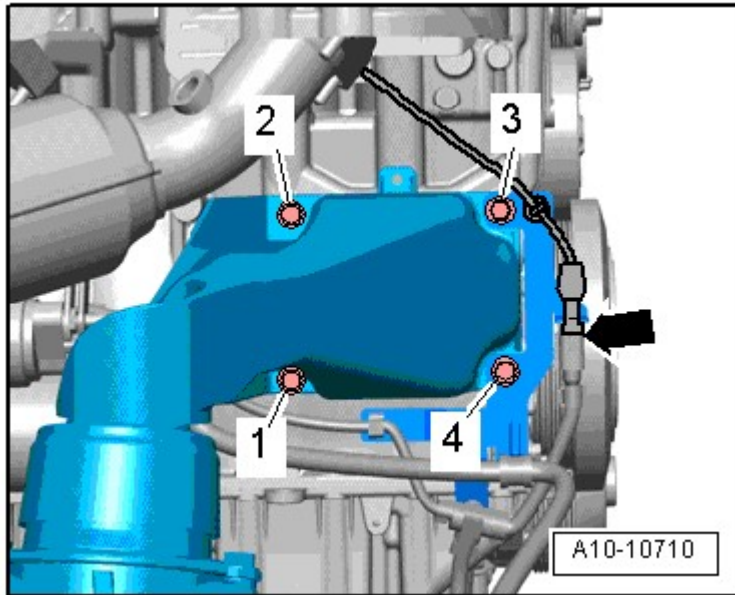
Identifying Bolts -1 To 3- And Engine Supports With Engine Bracket
